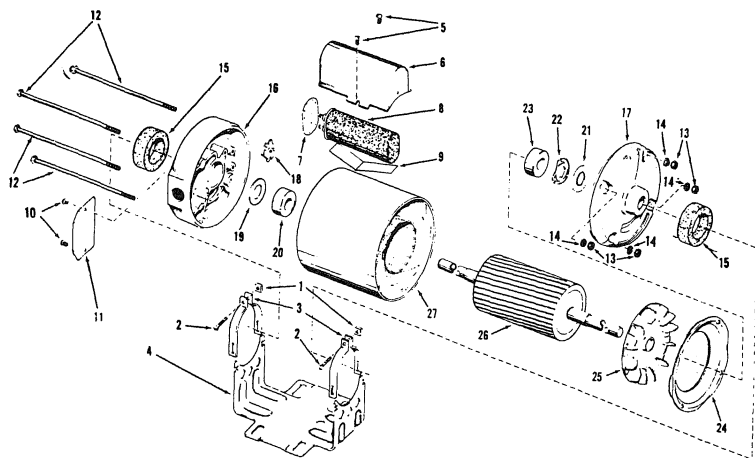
Compressor motor (Keco Model F18000-6 and Mecom Model 19099-G18000-5-Mec) sheet 1 of 2.
